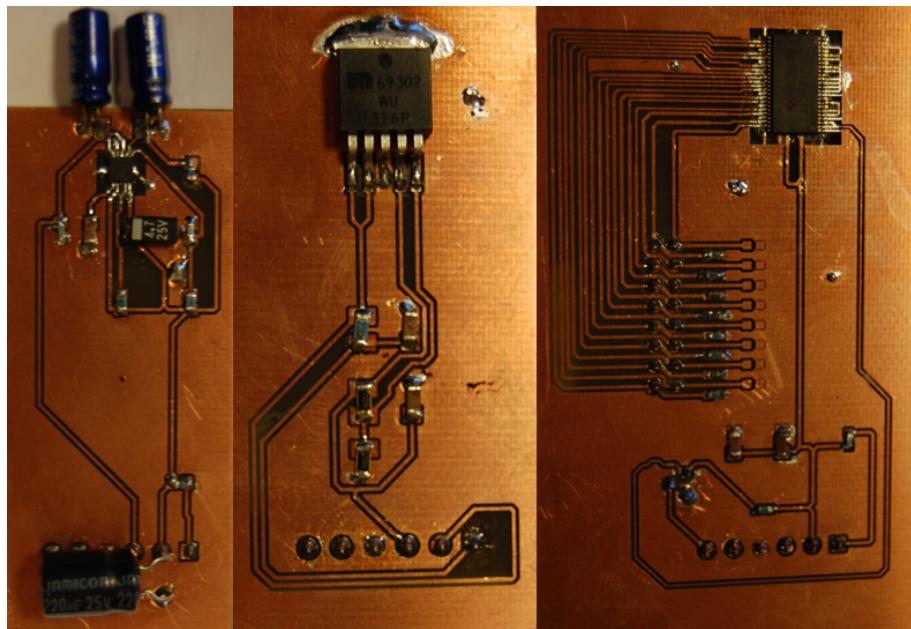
Picture of PCB boards, from left we have, TPS51200, MIC69302WU and SN74AVCB164245
